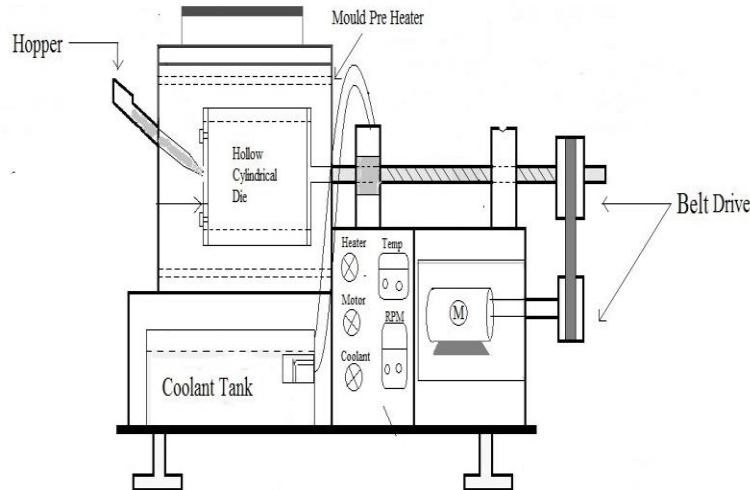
(a). Schematic illustration of the horizontal centrifugal casting machine.
